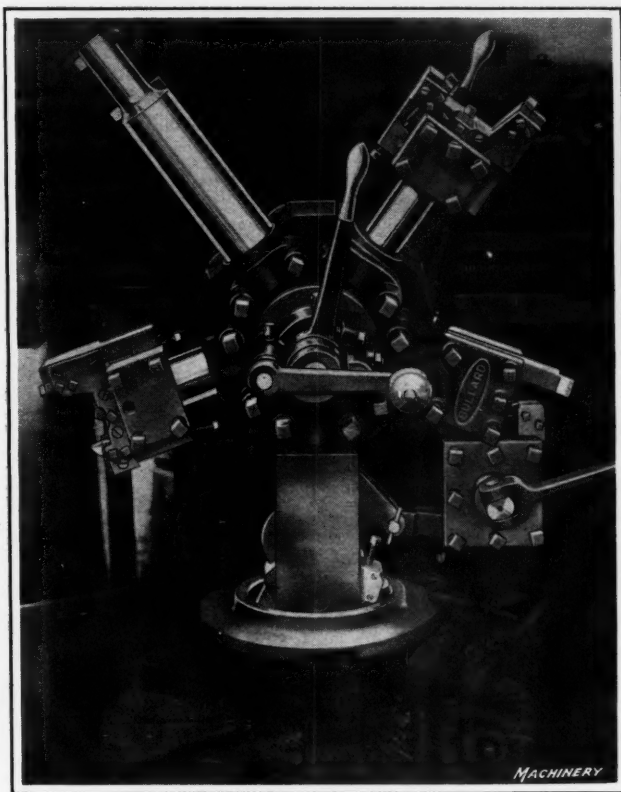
Special Tool-head shown in Fig. 13, in Operation turning Spherical Surfaces of Gear-case
